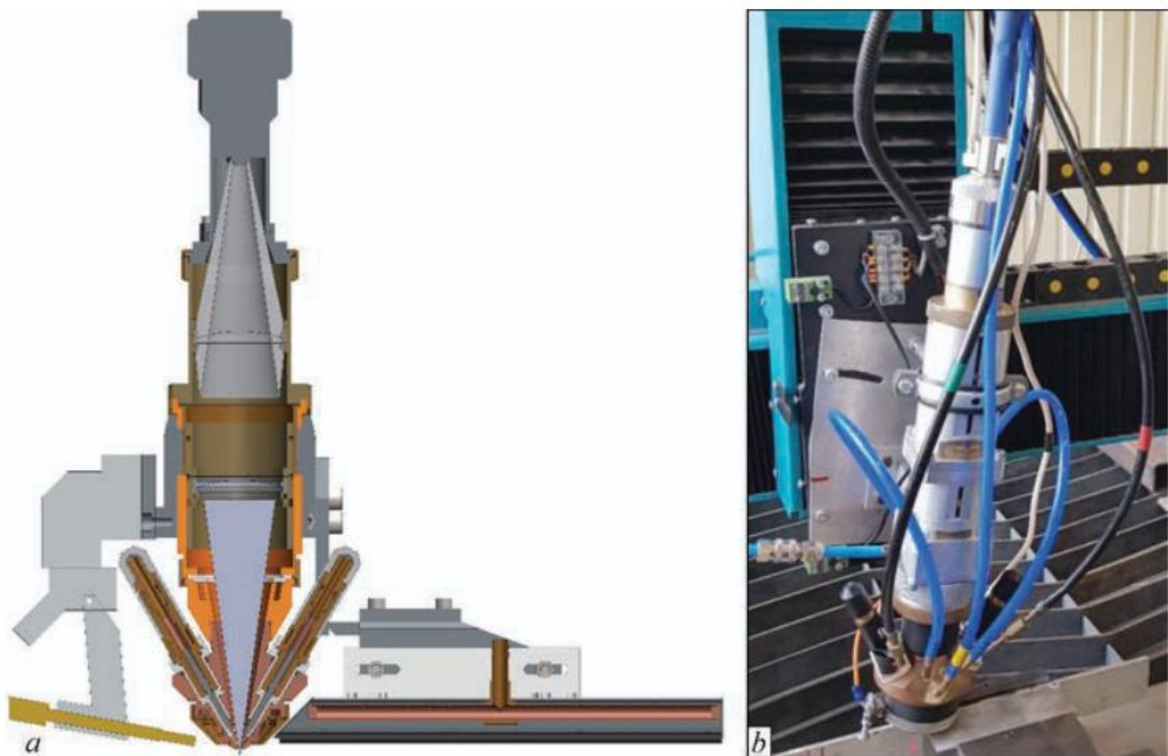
3D-model (a) and appearance (b) of the head for laser and laser-plasma welding, developed at PWI (Korzhyk et al., 2024).
